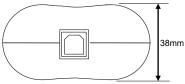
Dimensions - Side View 图 3. 尺寸图 - 侧面
